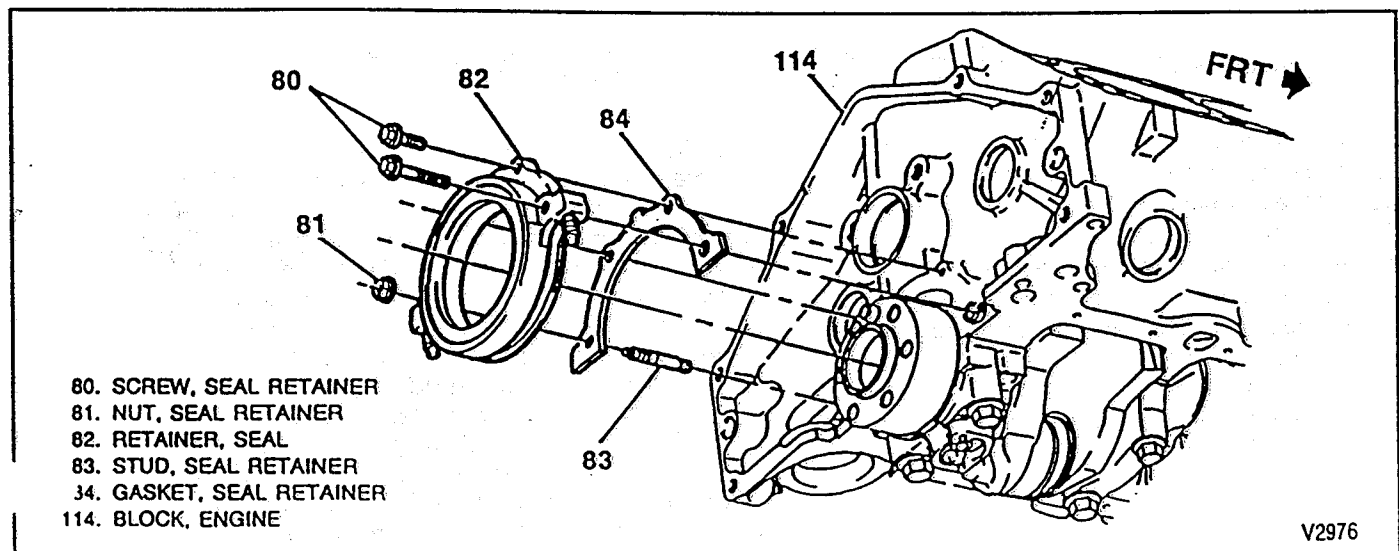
Crankshaft Rear Oil Seal Retainer (5.0L and 5.7L Engines)
